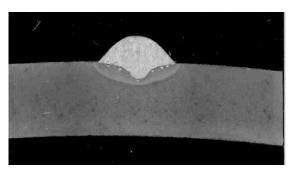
Weld A62 Macro, 0.53 kJ/mm, 2.5X Mag
